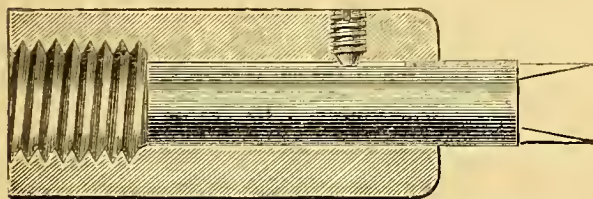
TOOL FOR RABBETING IN LATHE. FULL SIZE.
